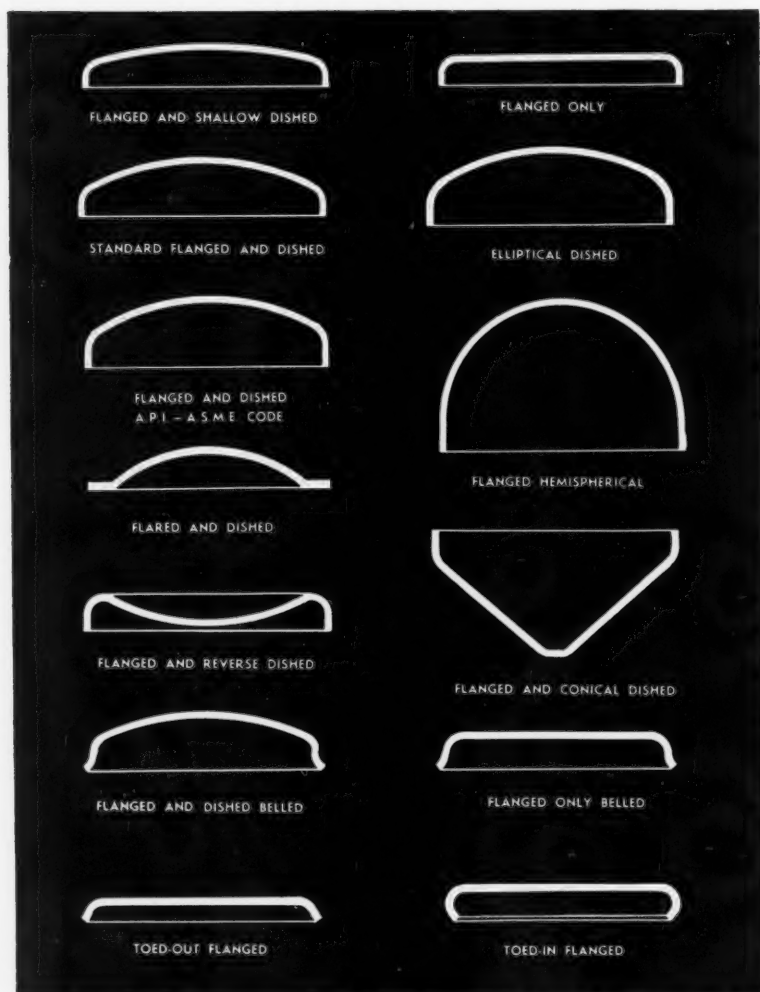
Cross-sectional Views of Standard Shapes of Heads that are Commonly Formed by Spinning
